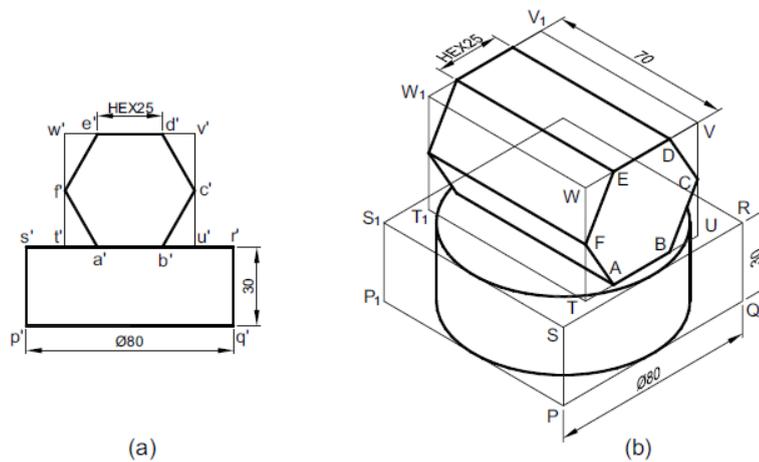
Hexagonal prism placed over a cylindrical block (a) Front view on a scale factor of 0.816 (b) Isometric projection
